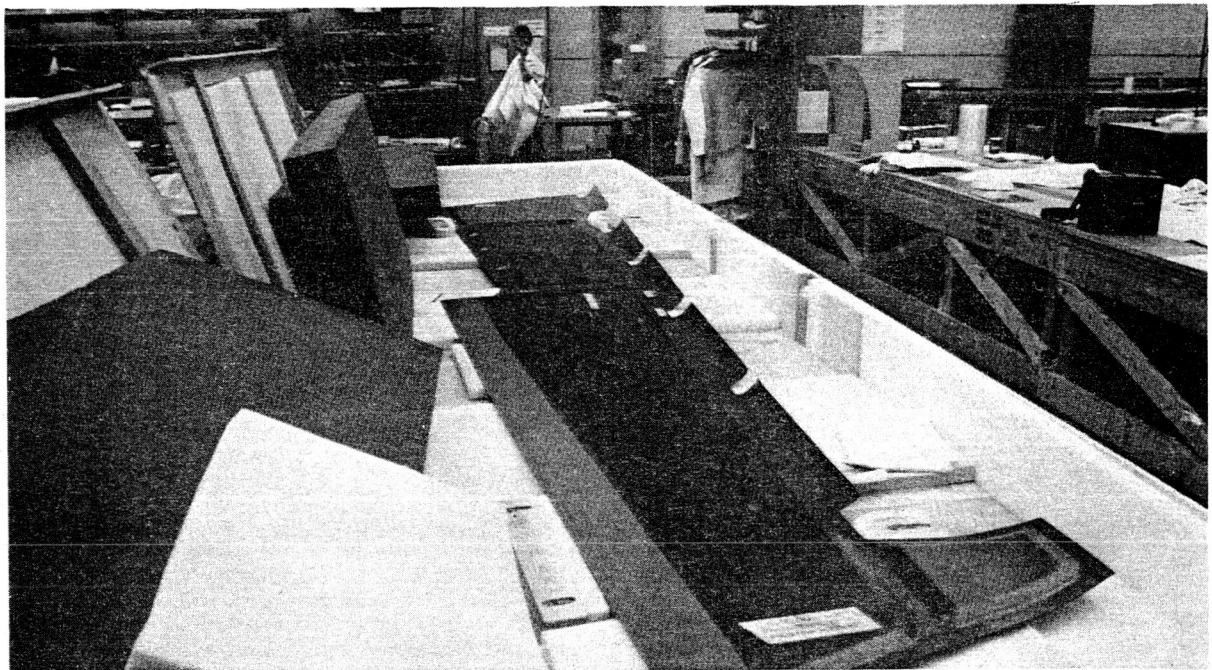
Upper Skin Panel Ready for Transport to Assembly Shop
